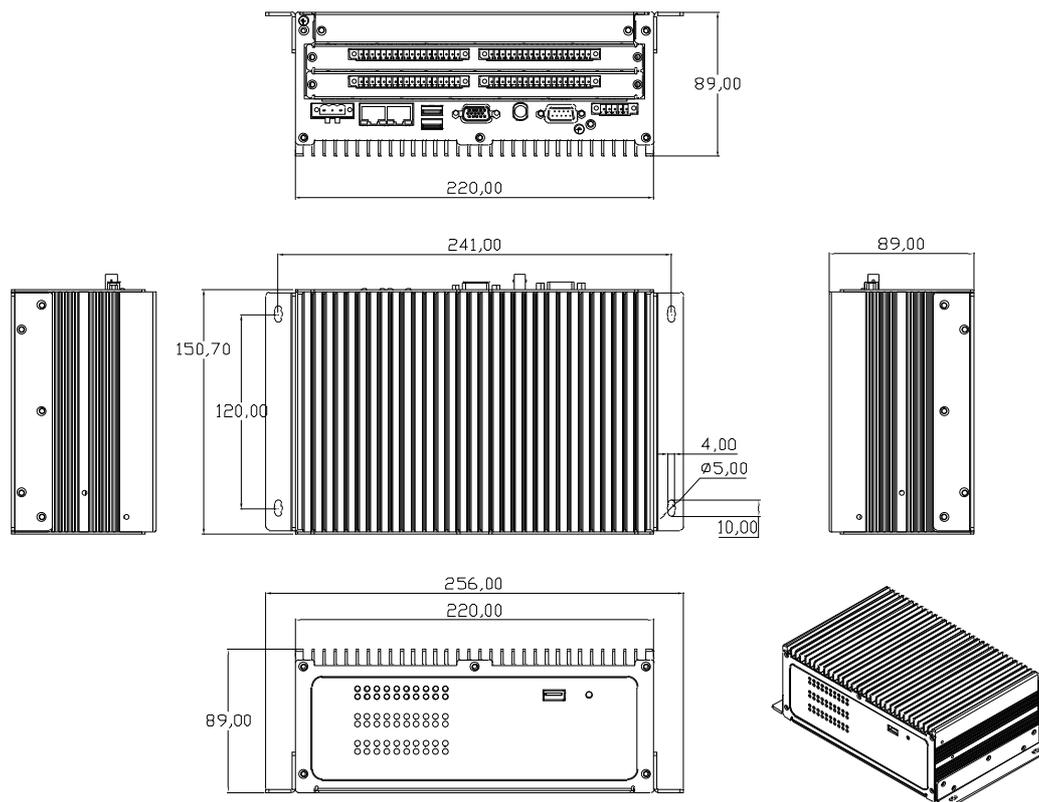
ECU-1871 Chassis Wall-mount mounting size
